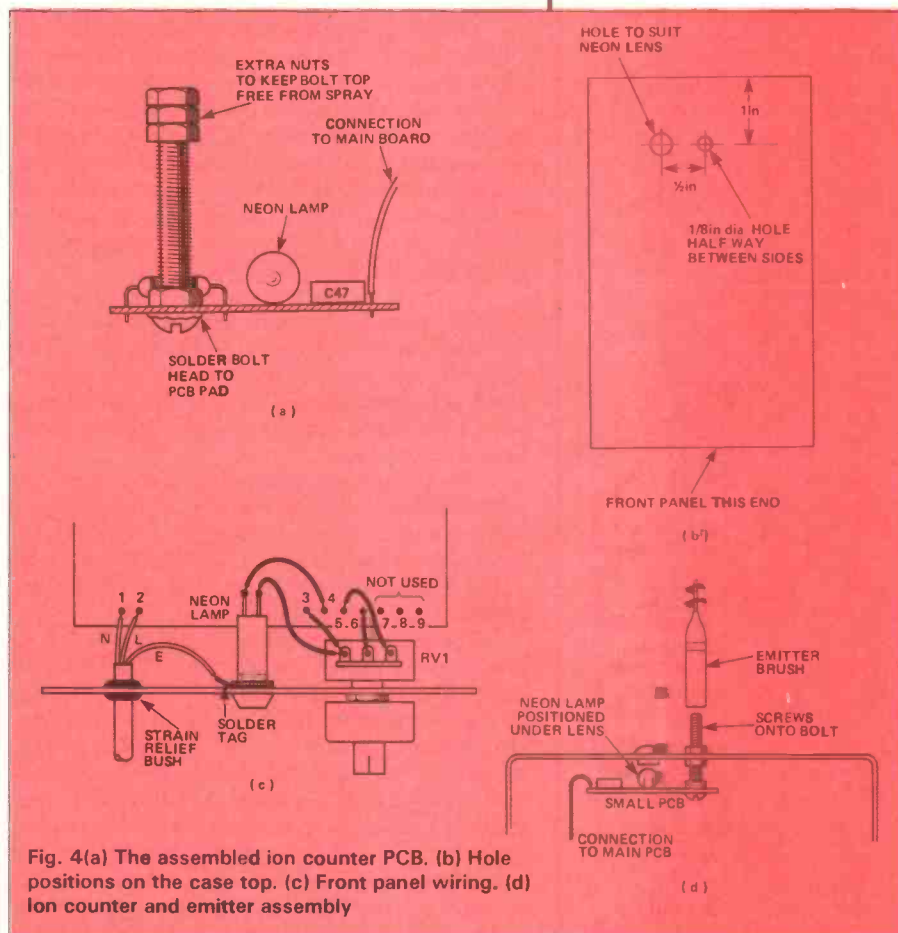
(a) The assembled ion counter PCB. (b) Hole positions on the case top. (c) Front panel wiring. (d) Front panel ion counter and emitter assembly
